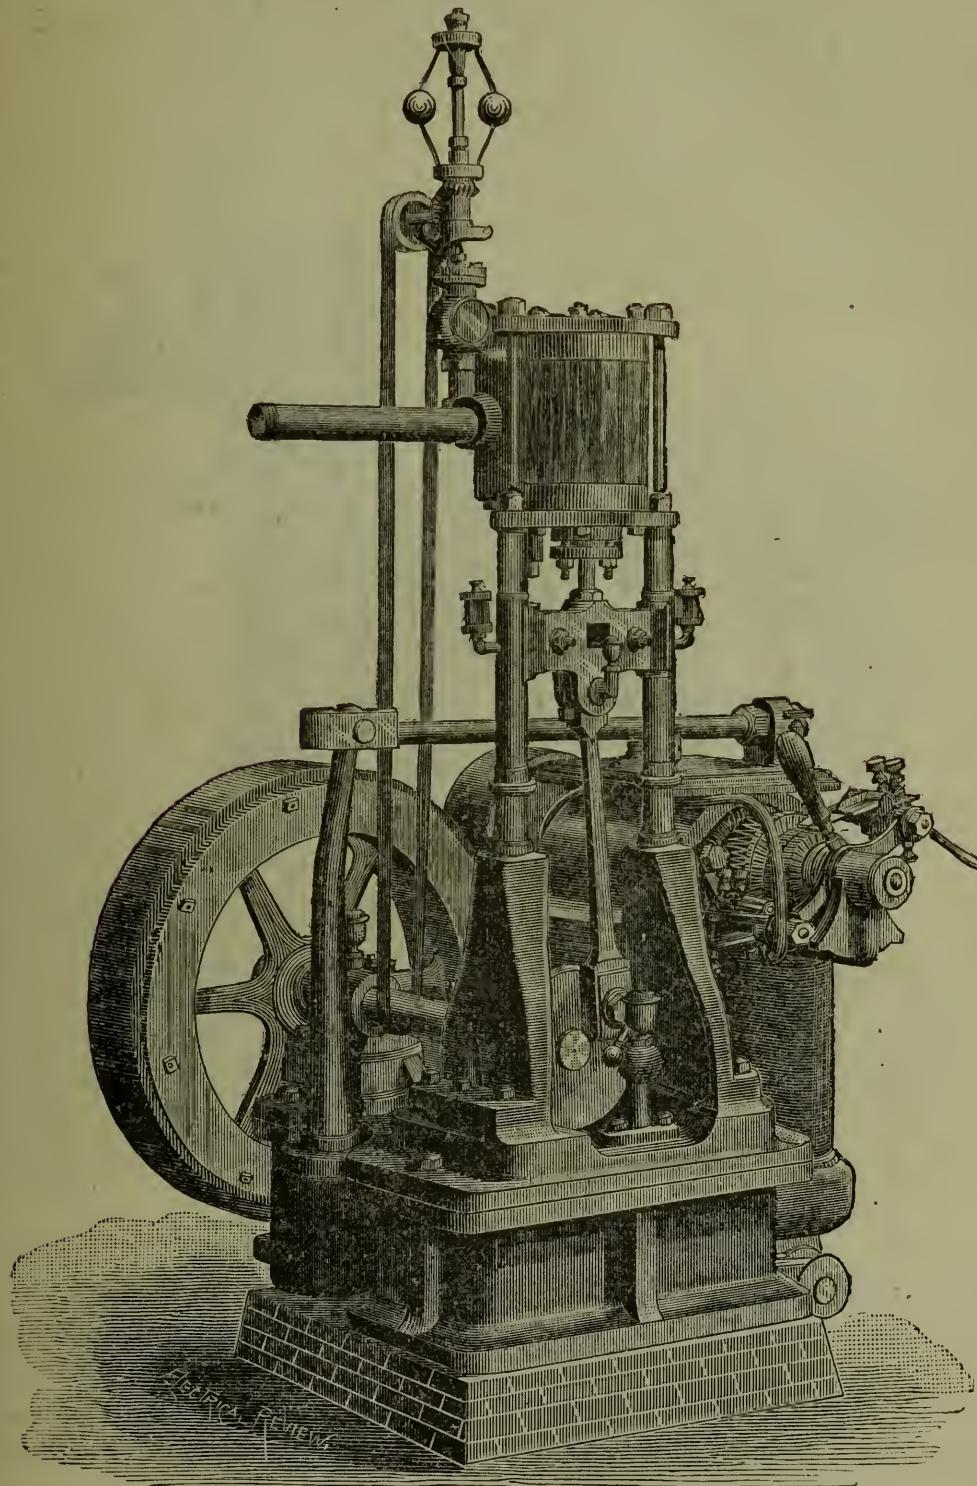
Plant of Steam Yacht *Restless*, Friction Gear.
